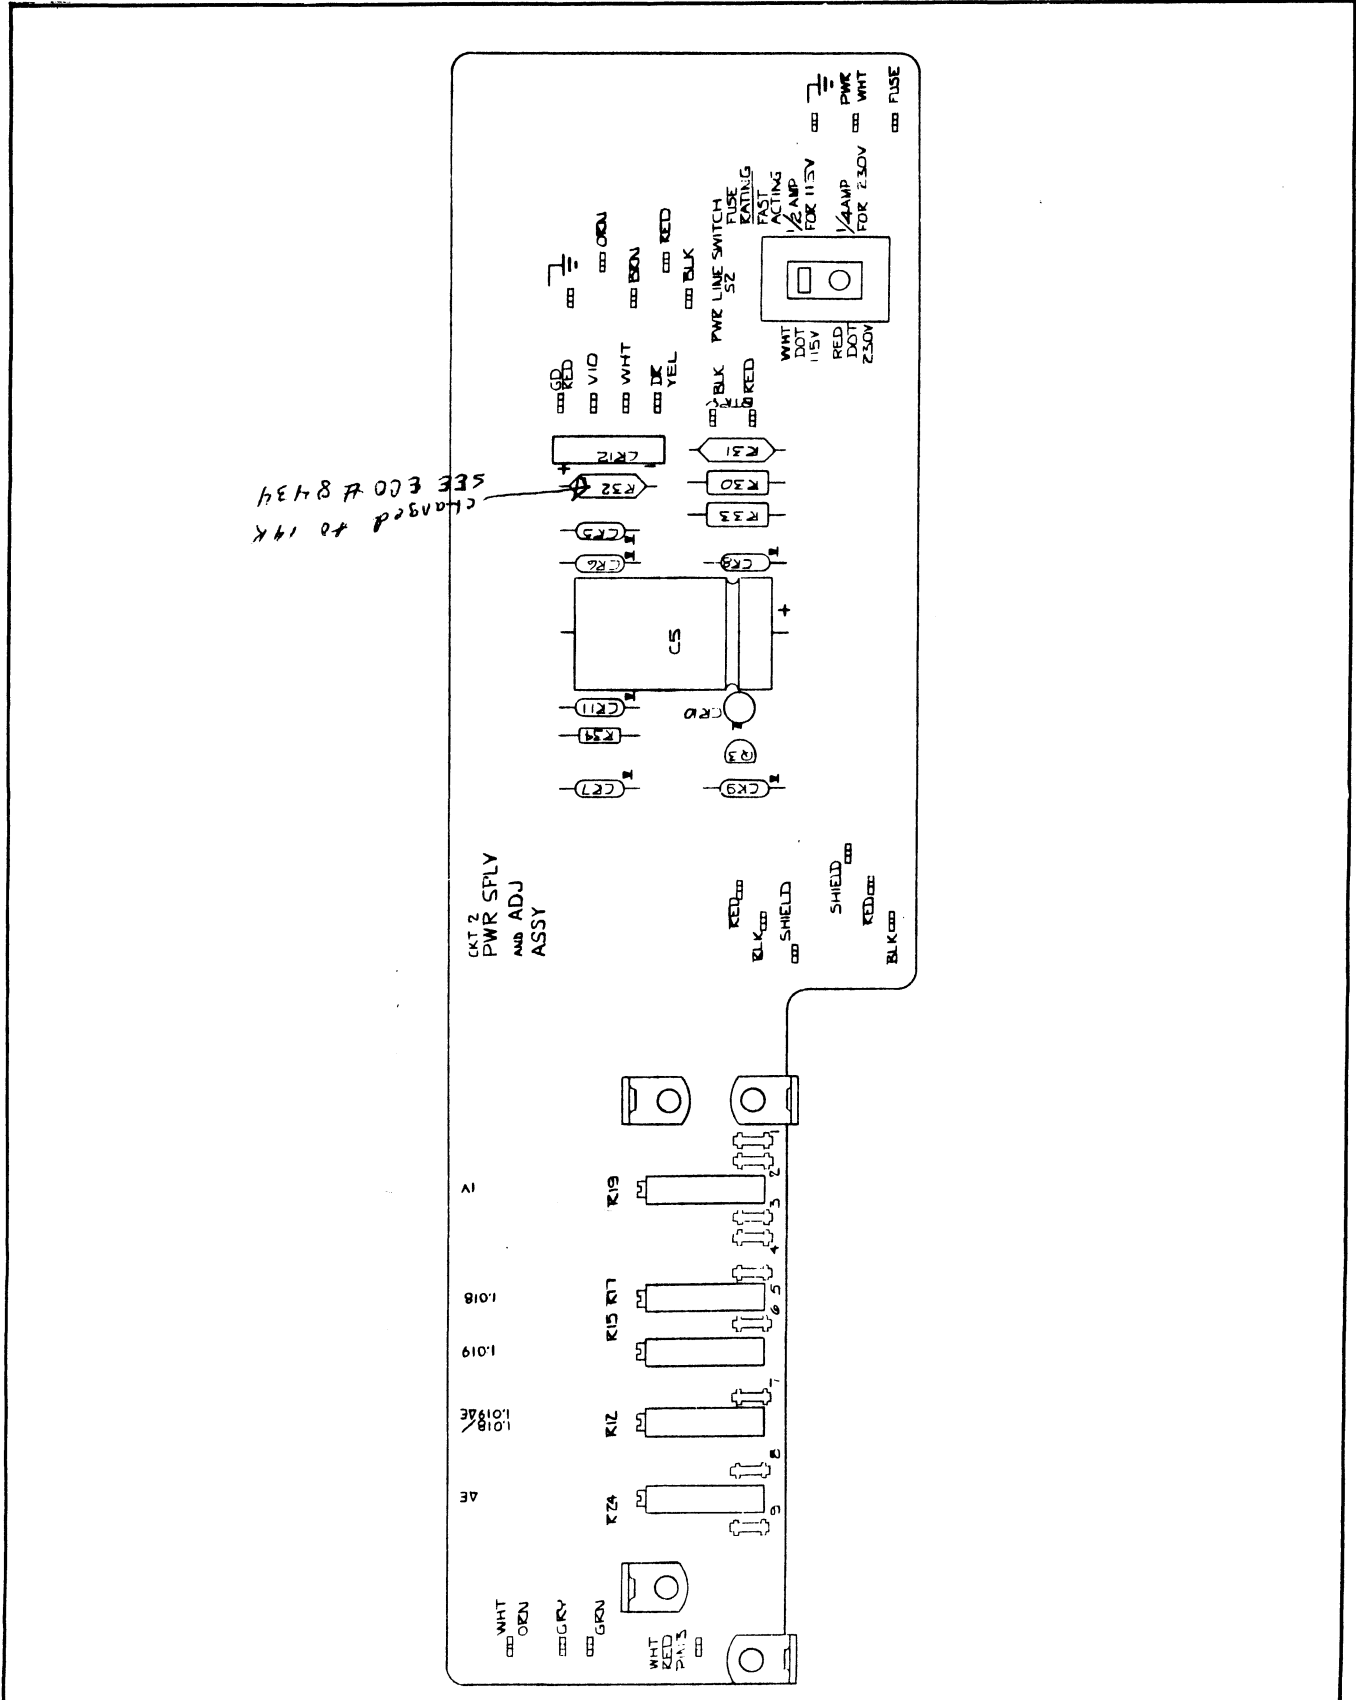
POWER SUPPLY AND ADJUSTMENT PCB ASSEMBLY.
